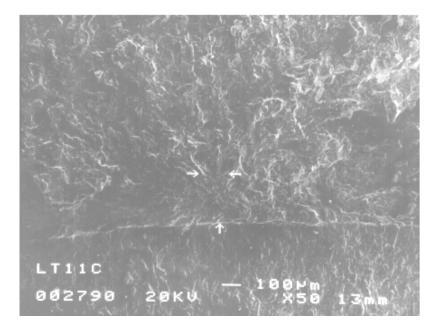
Fracture Surface– Specimen L-T 11
